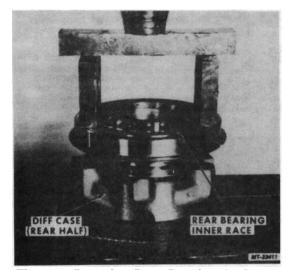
Pressing Rear Bearing On Inter-Axle Diff Case - Rear Half
